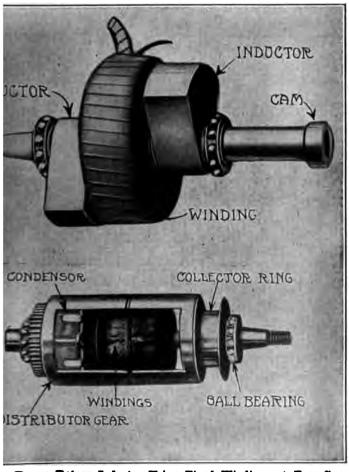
Sectional View of Bosch D U-4 Magnet
